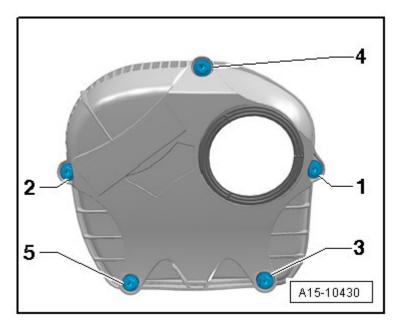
Identifying Upper Timing Chain Cover - Tightening Sequence
